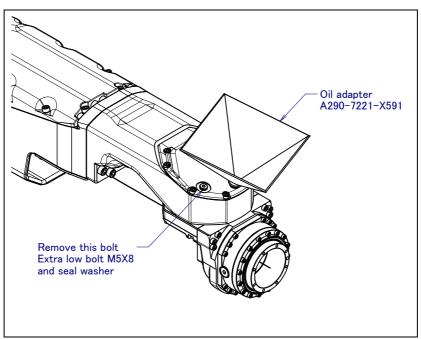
(e) Oil adapter (supplying oil J5/J6-axis gearbox)
